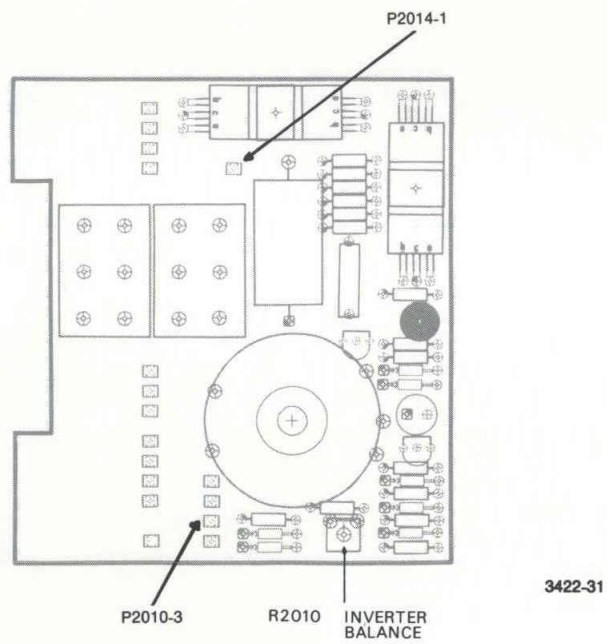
A8 DC-DC CONVERTER BOARD ADJUSTMENT LOCATIONS
